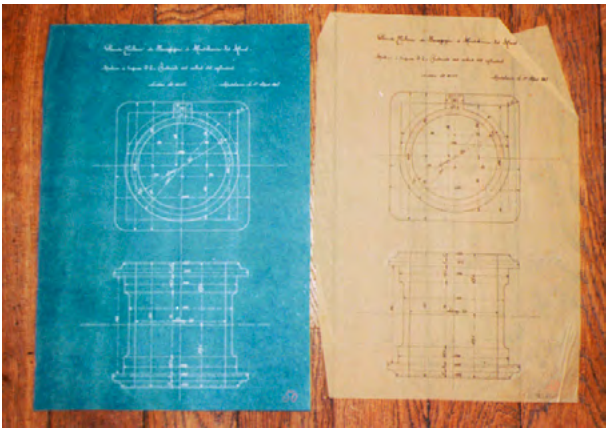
Le Creusot Ecomusée : Pipe machine circa 1901, drawing and print of manufactured part
